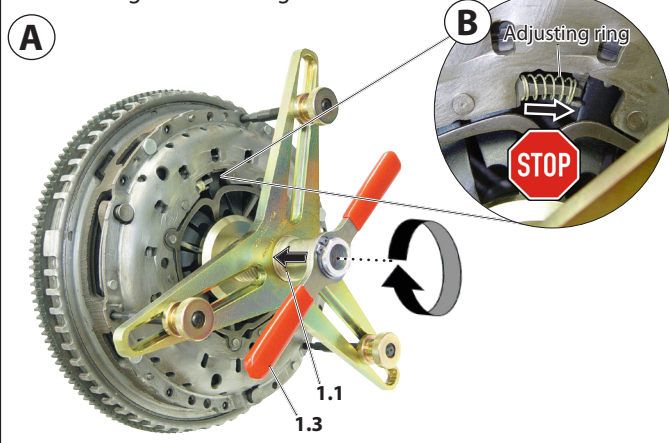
Tensioning the clutch pressure plate until the adjusting ring starts rotating clockwise.
